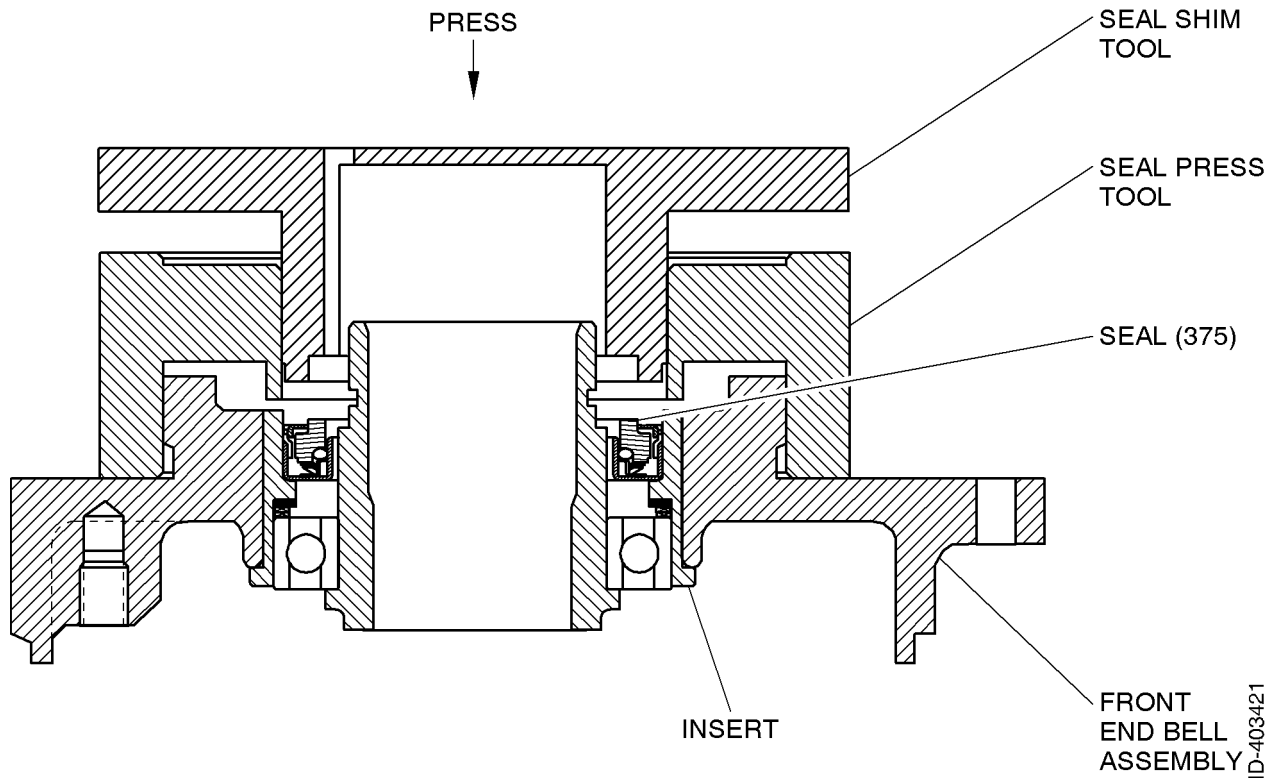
(Sheet 1 of 1) Seal Installation (GRAPHIC 49-42-02-99B-819-A01)
